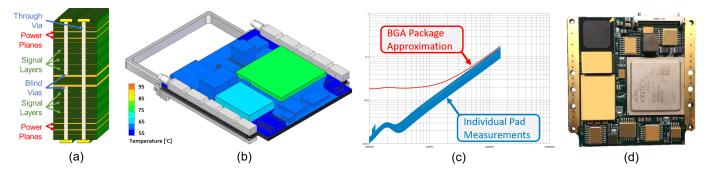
(a) 22-layer stackup manufactured to IPC-6012DS from HyperLynx (b) Component placement and preliminary thermal analysis based on 15W case (c) Core voltage power integrity analysis at PCB vs BGA (d) Primary side of assembled SCv3M
